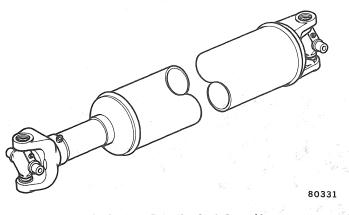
E-3 Rear Propeller Shaft Assembly-Cherokee. Wagoneer and Truck Models
